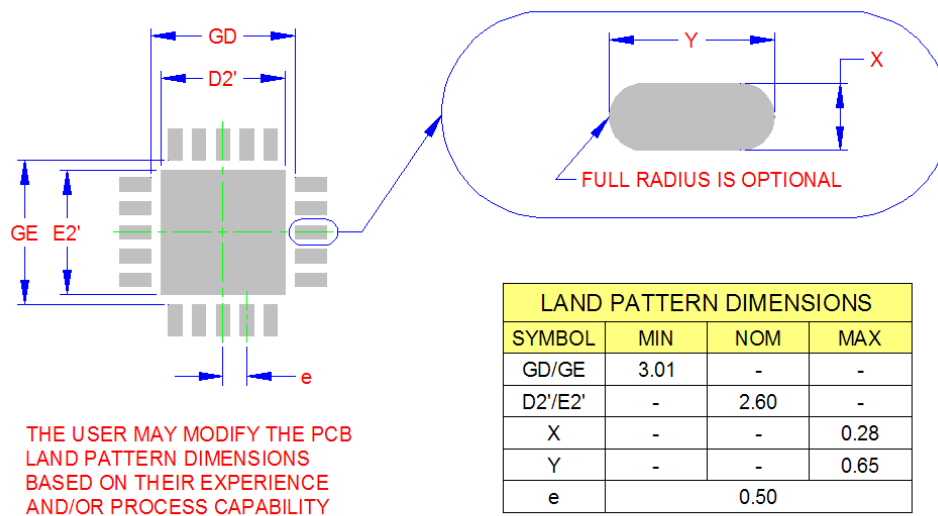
EMC2112 Package Drawing - 20-Pin QFN 4mm x 4mm
